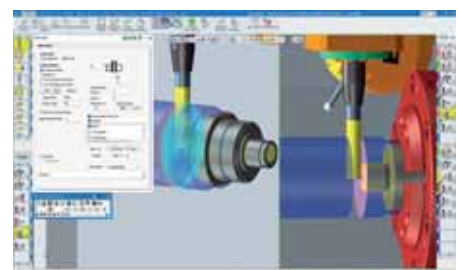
A new mill cutoff process for mill-turn machines and bar-fed mills now supports perpendicular cutting with an end mill, or parallel cutting with a side mill or slitting saw.
